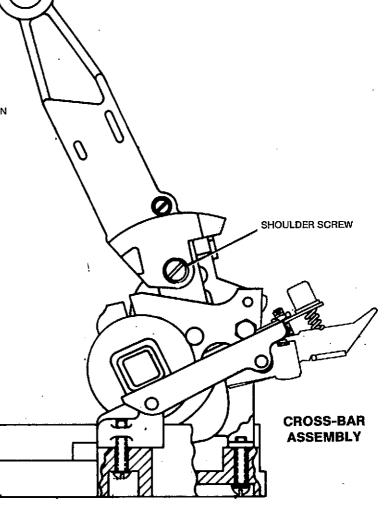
REAR CONNECT TRANSFER SWITCH ASSEMBLY
